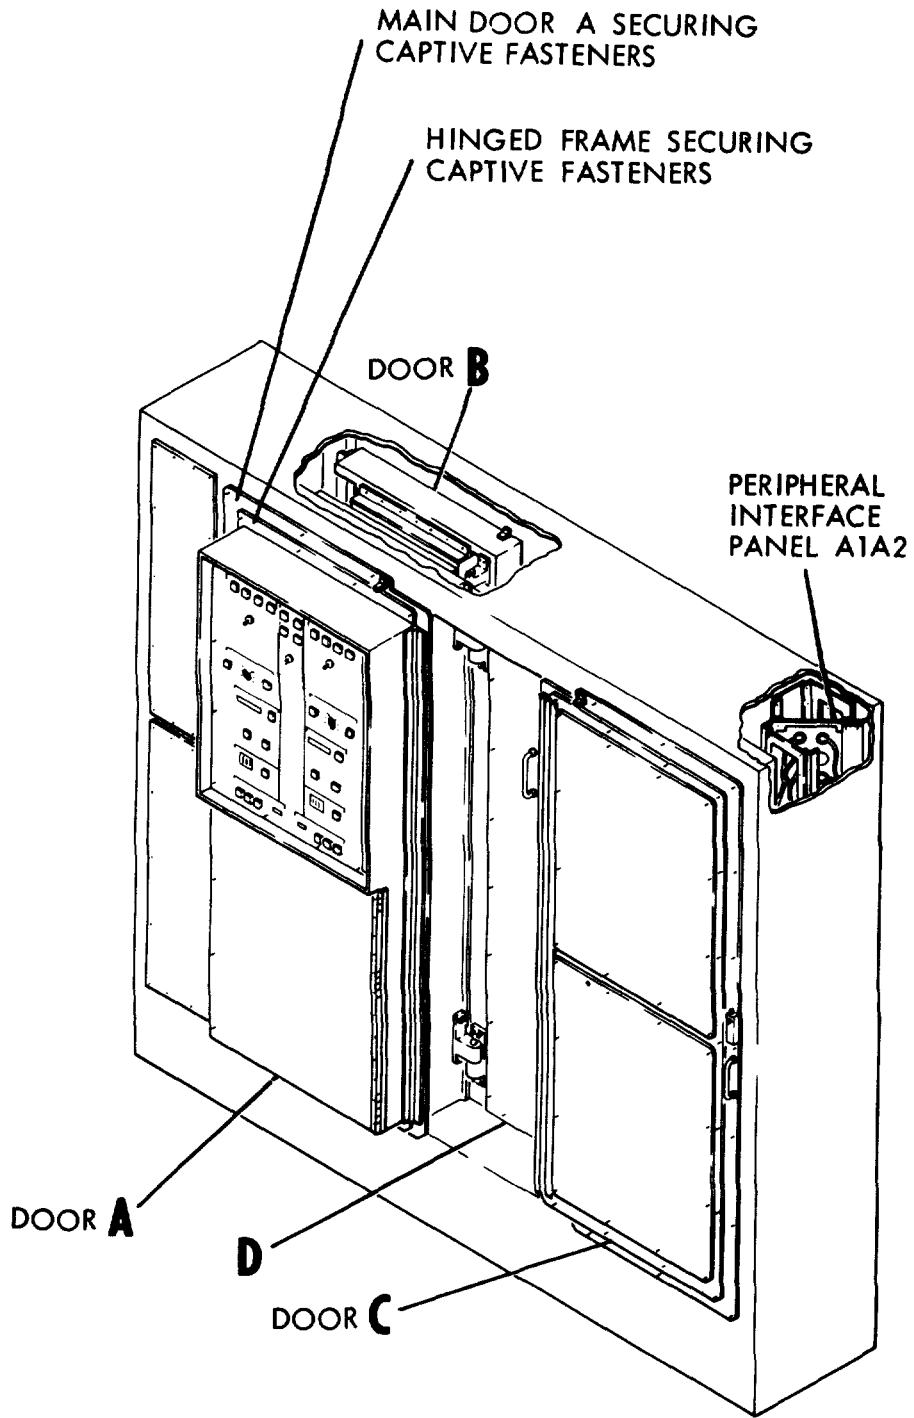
Message Switch ADP Assembly (Sheet 1 of 5).
